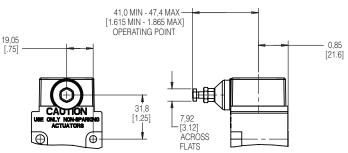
MICRO SWITCH BX2 Series Side Rotary Product Dimensions • mm [in] Side Rotary - Head Codes: A, P, AND R
